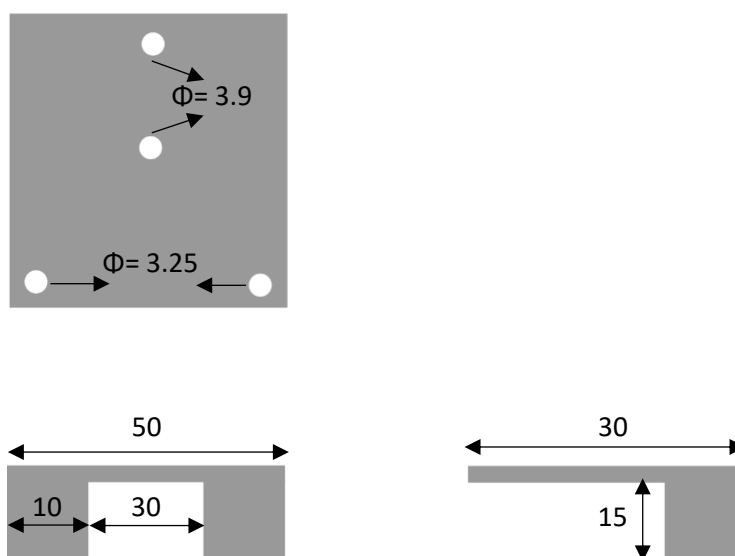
Schematic of the top (top left), front (bottom left), and the side (bottom right) view of the motor connector with dimensions in mm.
